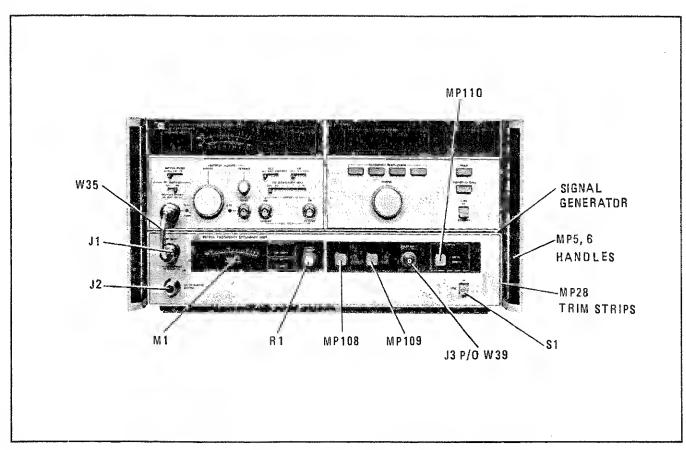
FEU Front Panel Chassis and Mechanical Parts Identification
